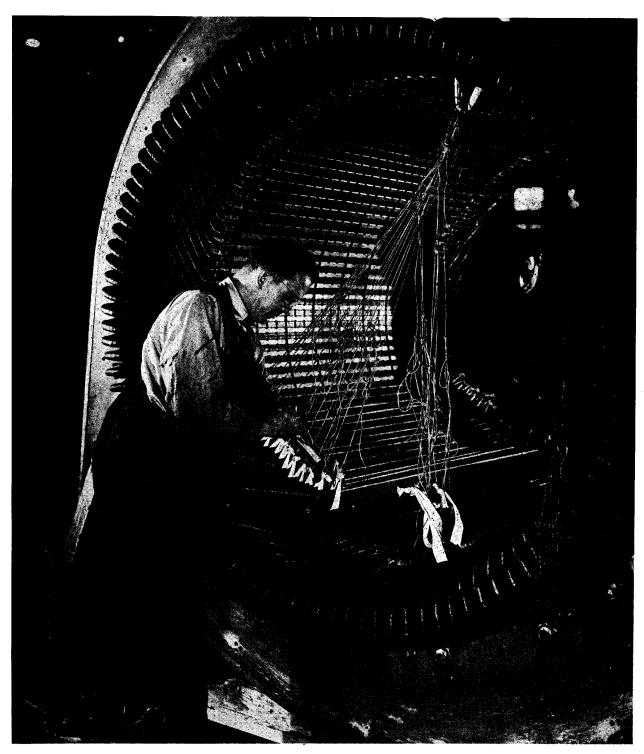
Factory View Showing Workmen Completing the Winding of a Horizontal Generator. Closing the Splits of a Sectionalized Stator. (Vertical Machine Would be Done in a Similar Manner).
